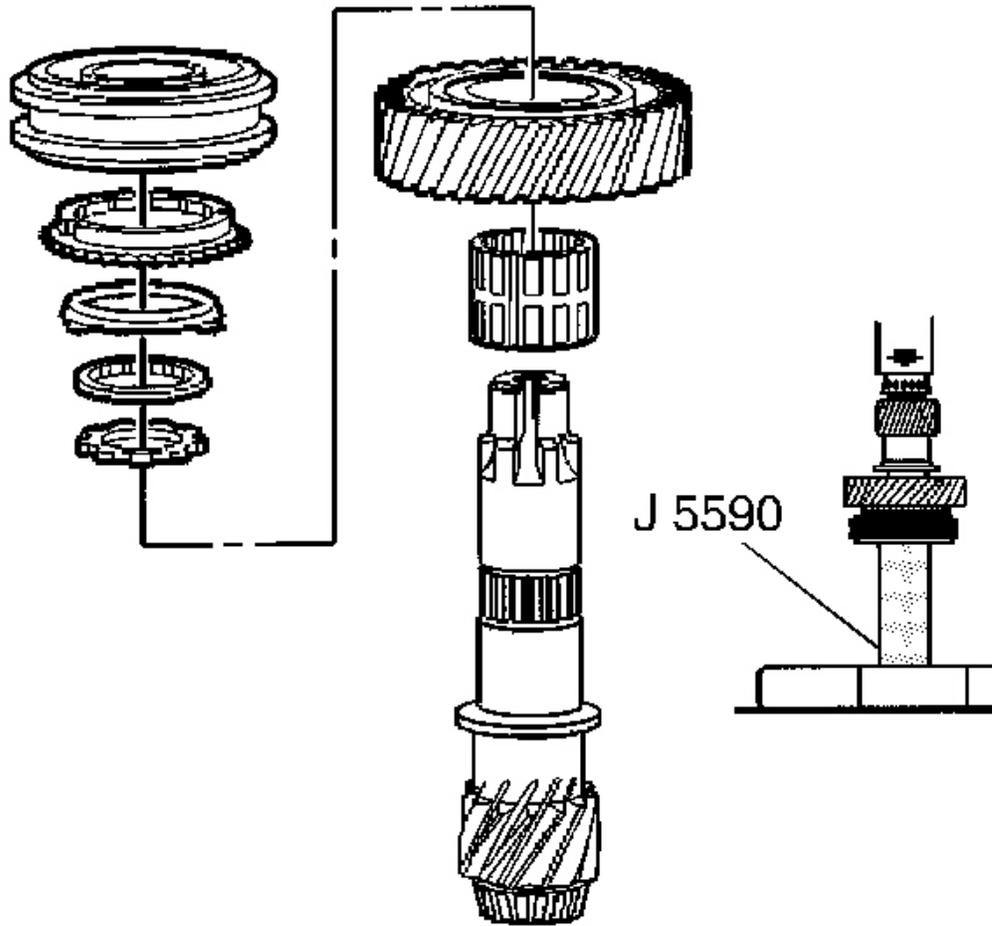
Installing 5th/6th Speed Synchronizer Assembly
